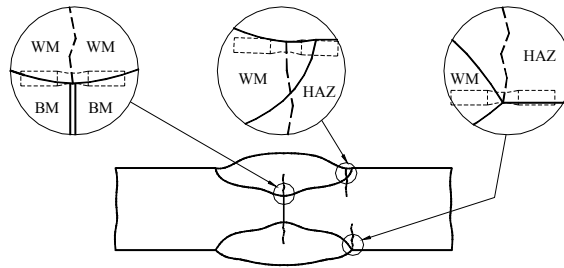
Typical crack initiation locations for a welded joint.
